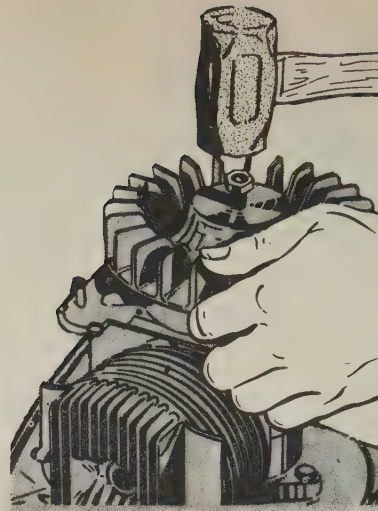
One way to loosen the flywheel from a tapered shaft.
